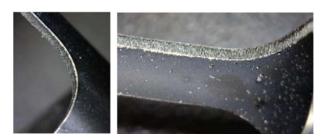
Cutting details of the fabricated specimen with thin oxide by using the laser cutting machine.
